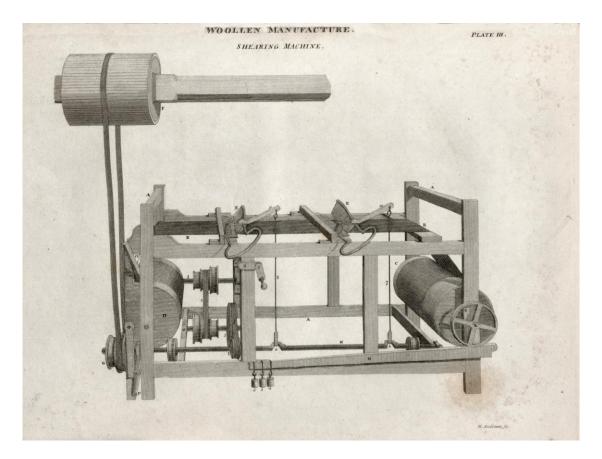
Woolen Manufacture, Plate III, Shearing Machine, *The Cyclopædia* (Philadelphia: Rees, Abraham, 1802). *Courtesy, the Winterthur Library: Printed Book and Periodical Collection.
